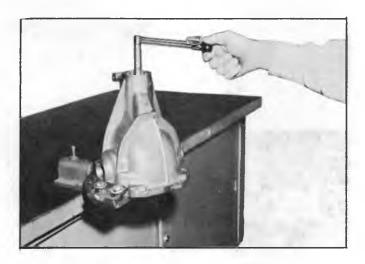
C-Measuring Drive Pinion Bearing Rotating Torque
